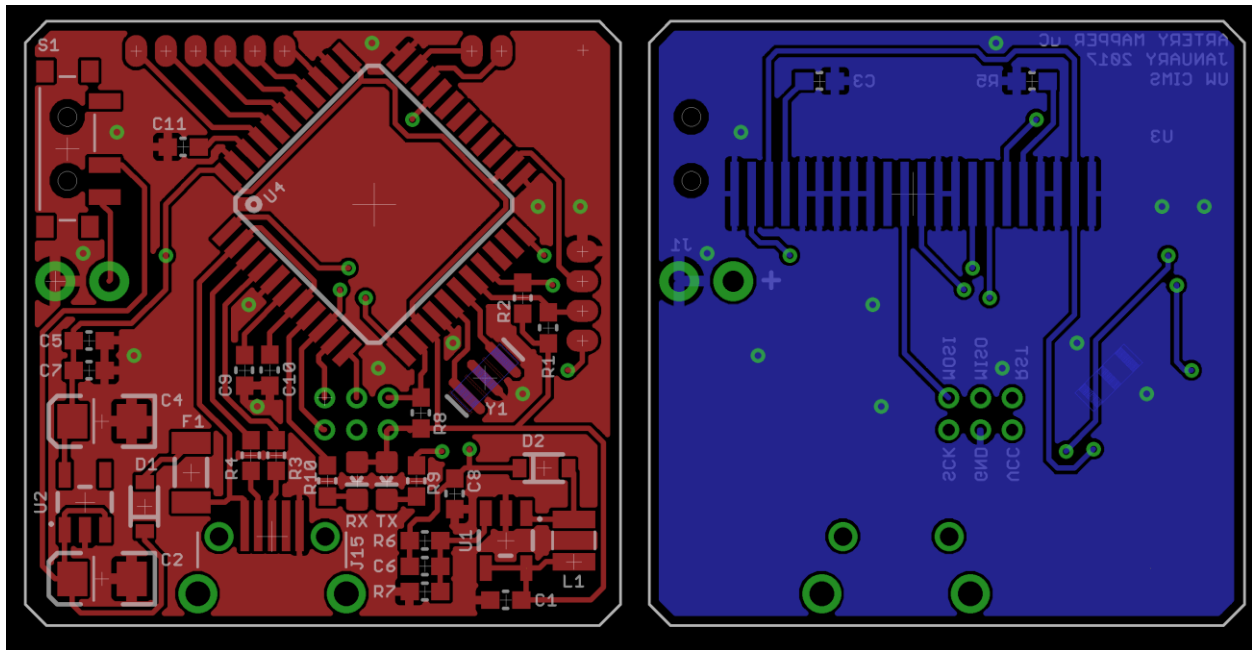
Board layout of uC + Display board, top (left) and bottom (right)
